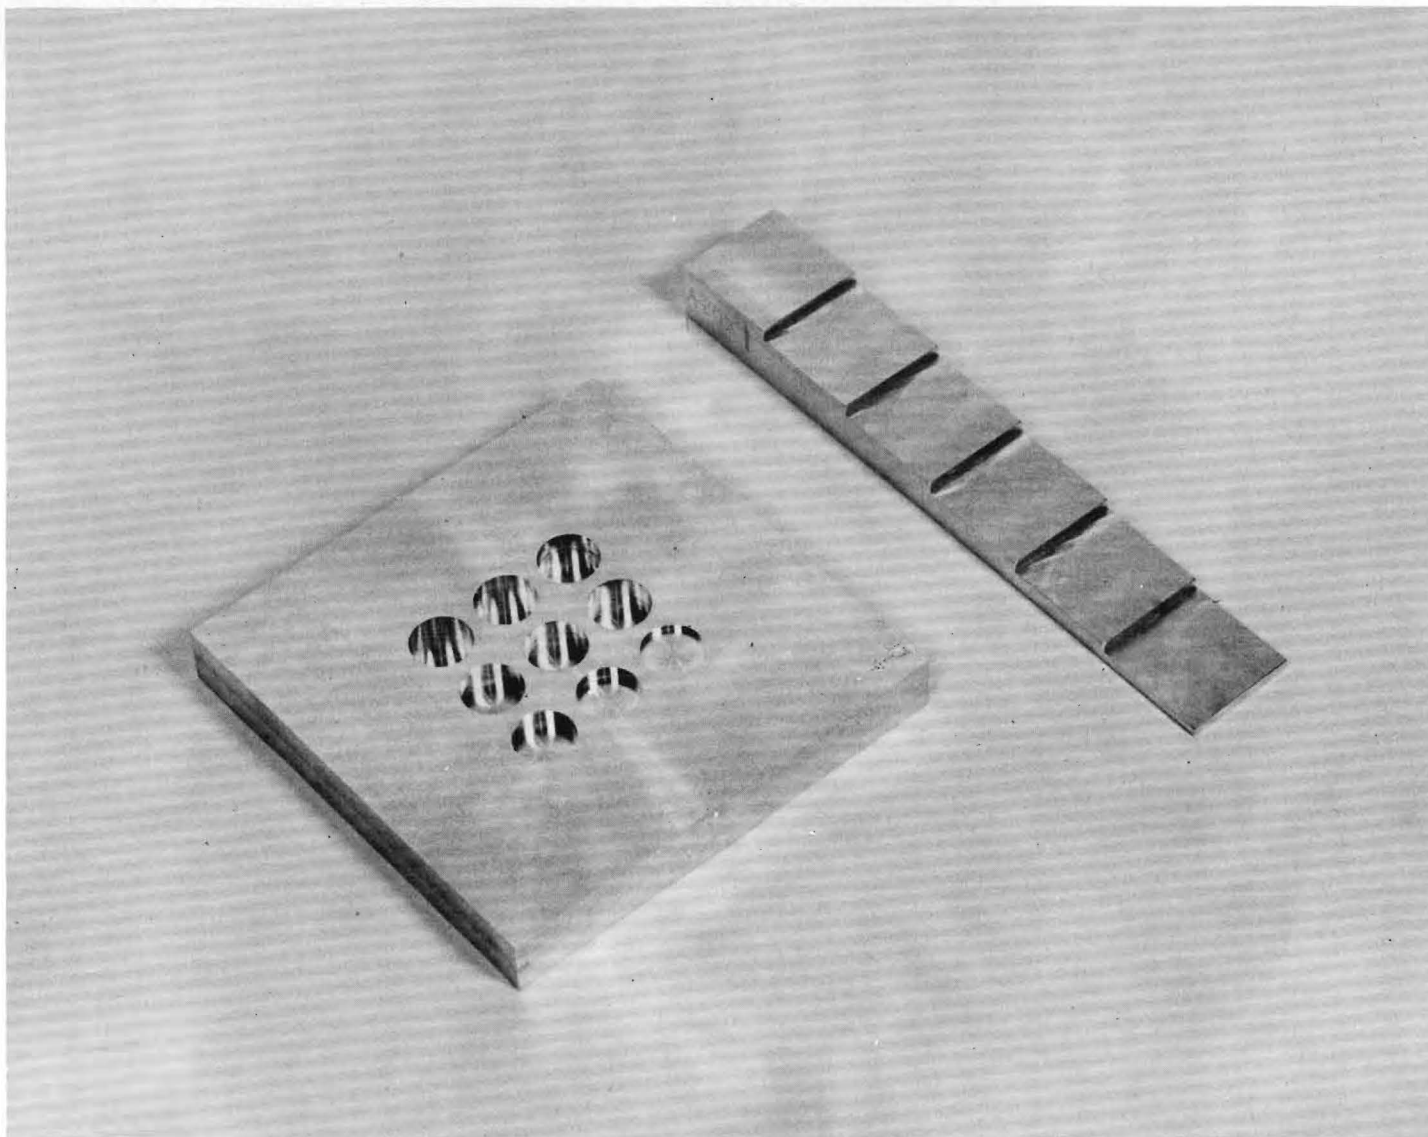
Aluminum Penetrameters Used to Standardize Film-Processing Technique.
